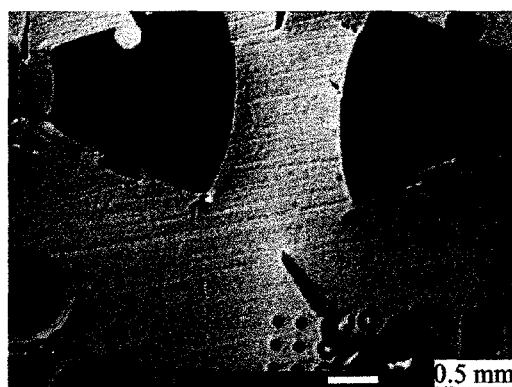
A 94% alumina mold after bisque firing showing distortion and cracking.
